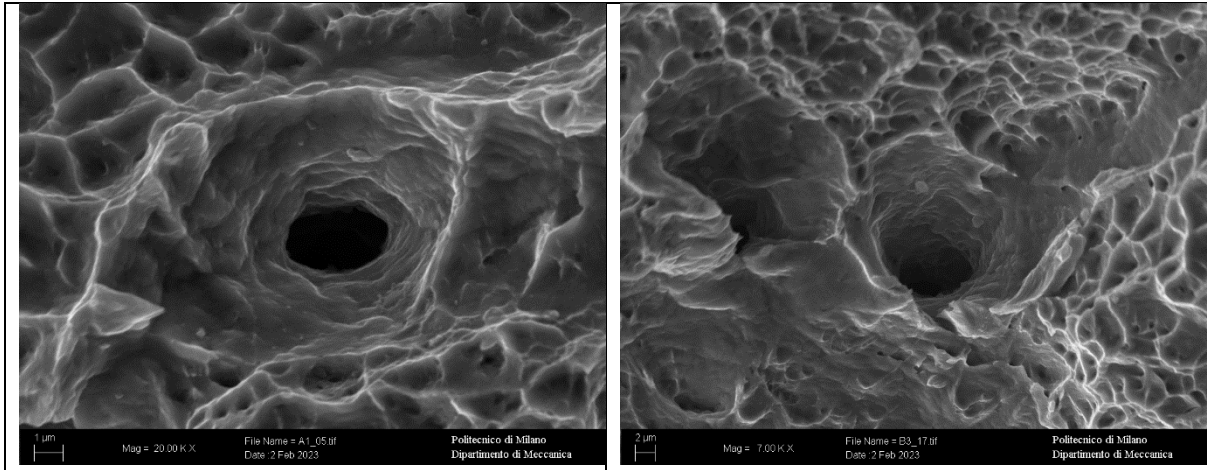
Fracture surface of TIG AC welded specimen.
